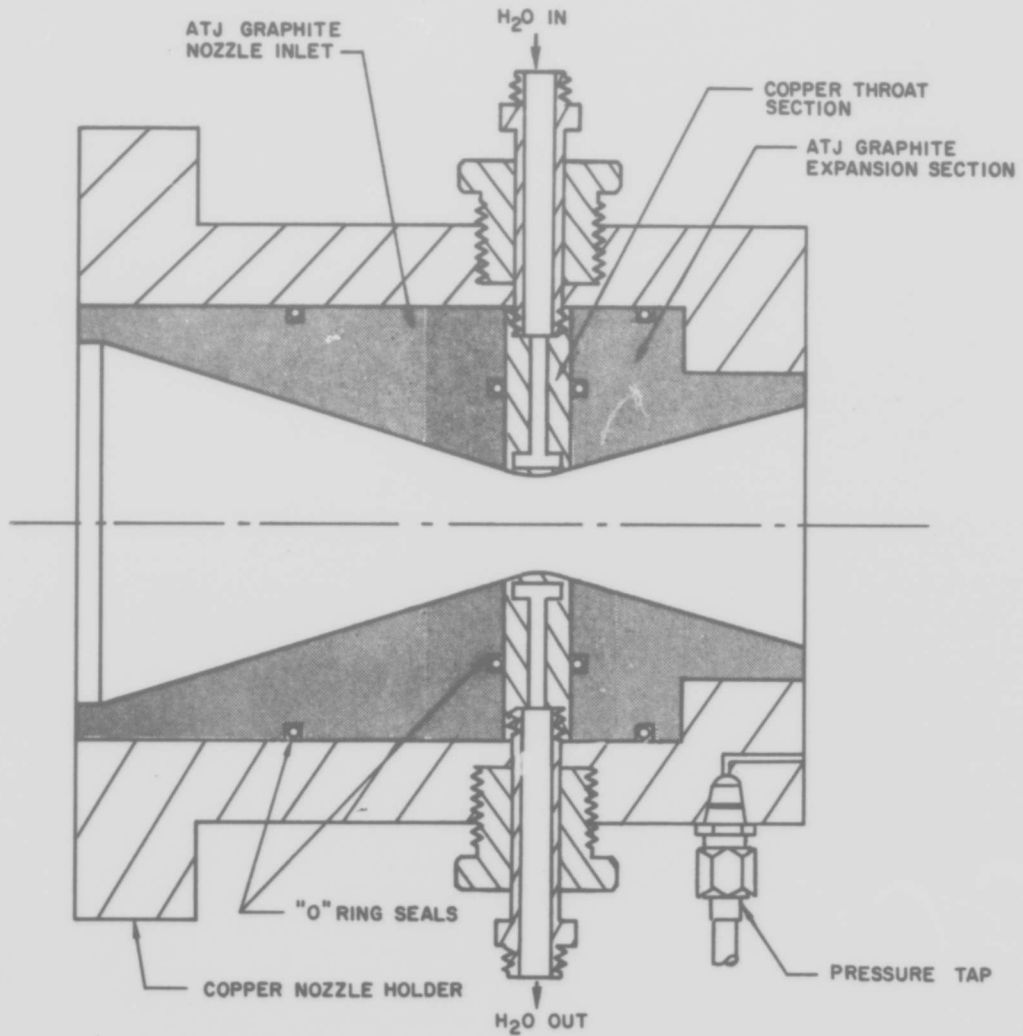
WATER - COOLED NOZZLE ASSEMBLY
